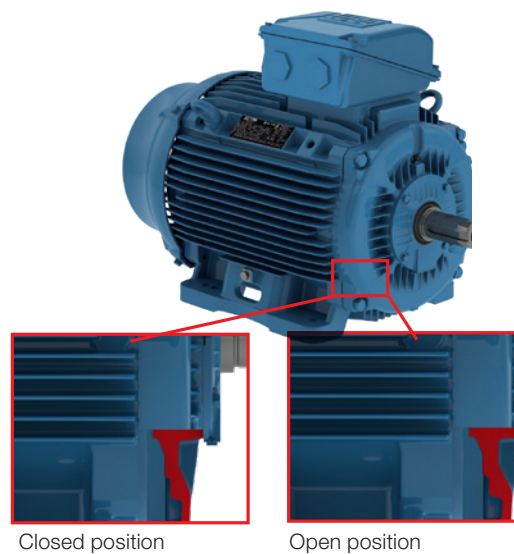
Detail of the rubber drain plug mounted in closed and open position
